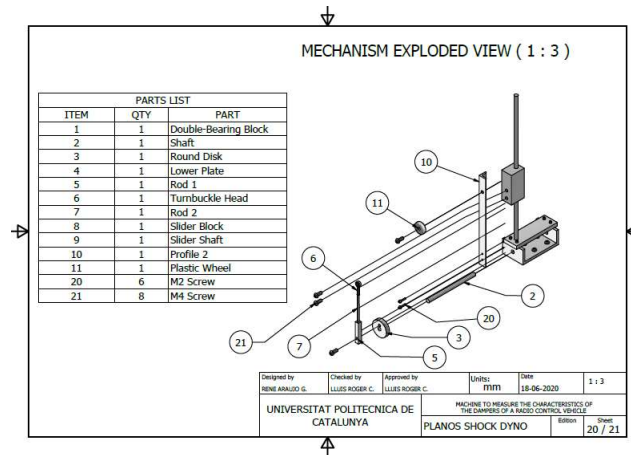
Motion Mechanism Assembly Blueprint with its parts list.
